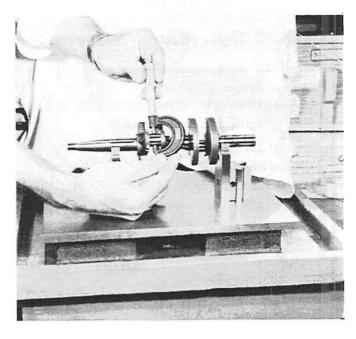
Checking Diameter, Crankshaft Bearing Surfaces
